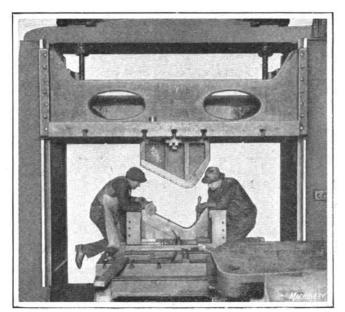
Matching the male and female die members of a set in an imprinting machine
